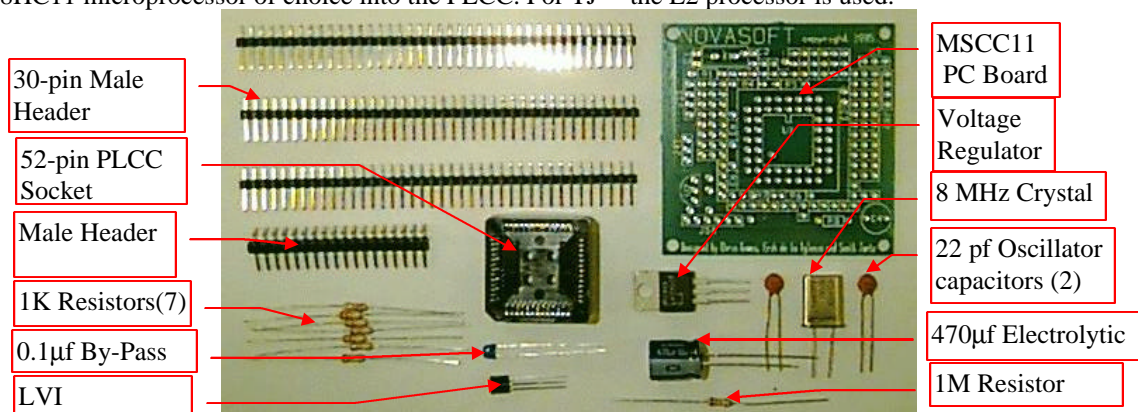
The MSCC11 parts inventory: 3 30-pin male headers in the upper right.
